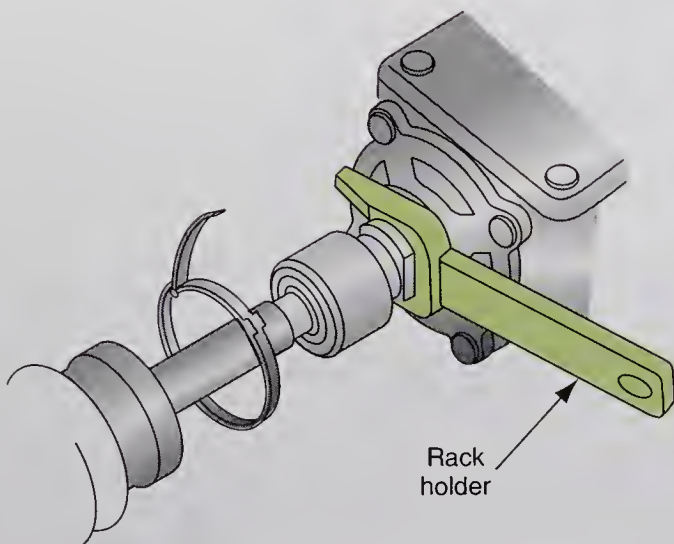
Installing the special rack holding tool between the actuator housing and the stop washer.
